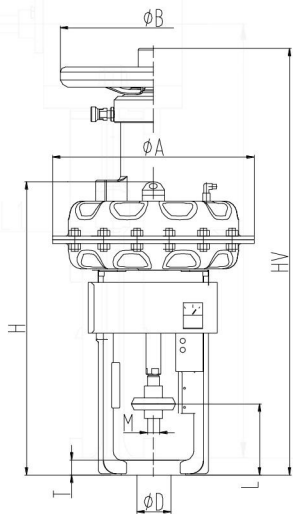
Actuator with or without Top Mounted Handwheel
